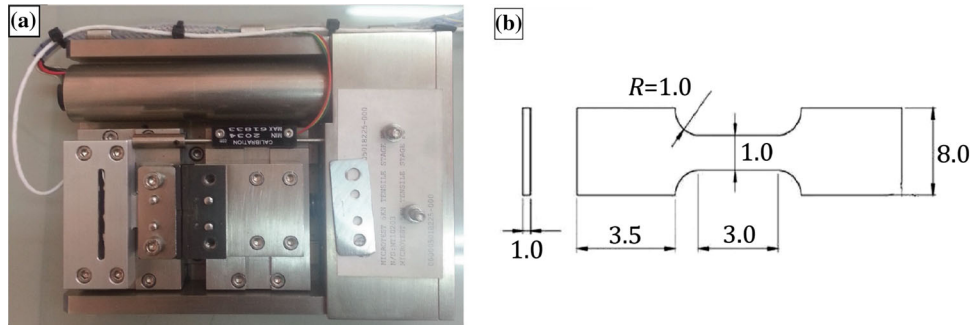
(a) Micro-tensile test machine and (b) dimensions of micro-tensile samples (in mm)
